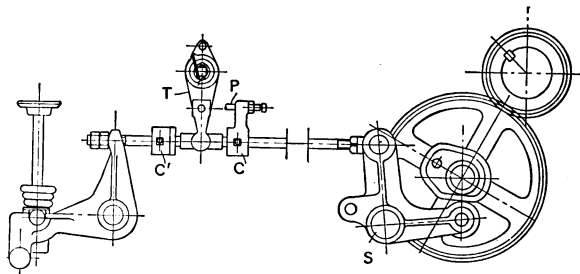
Valve Operating Mechanism, Rumely-Olds Engine.
